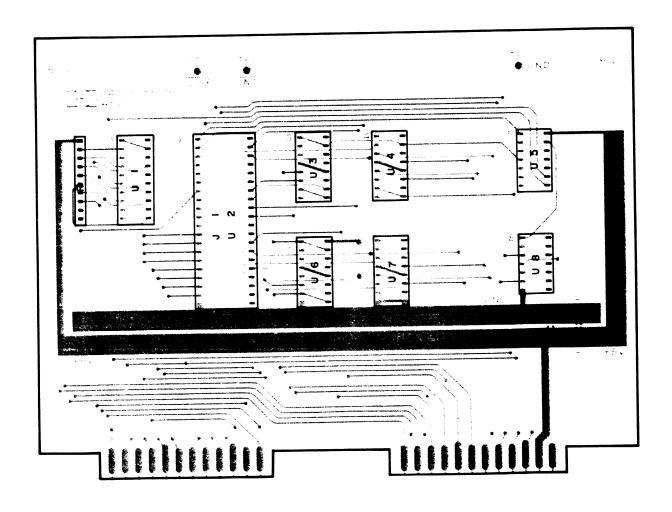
Al6 HP-IB Board Assembly Component Locations.
